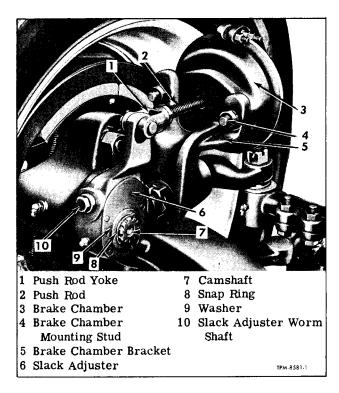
Front Brake Chamber, Bracket, and Slack Adjuster Installed on Axle
